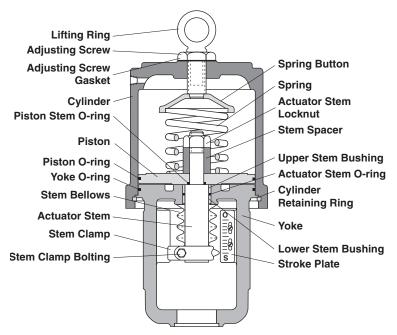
Internal view of piston cylinder actuator. (*Courtesy of Valtek International*)
